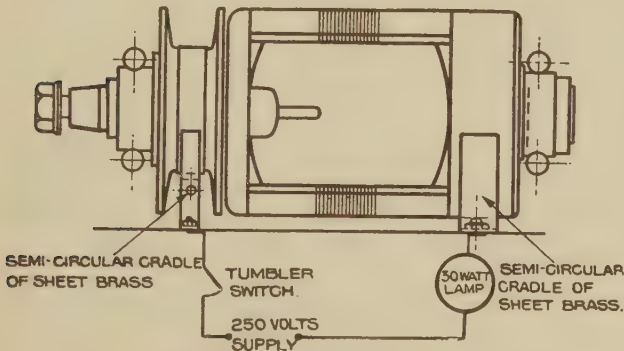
Slip-ring Connections used for Testing Purposes.
